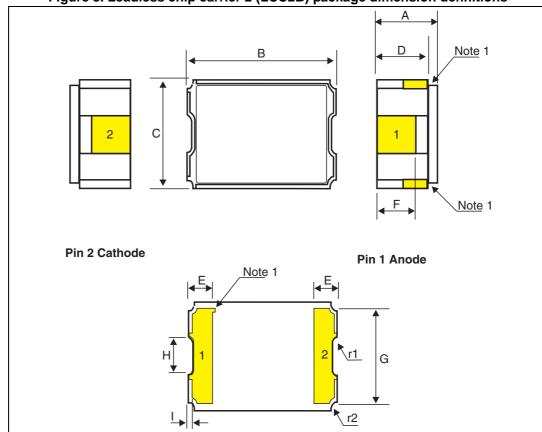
Leadless chip carrier 2 (LCC2B) package dimension definitions
